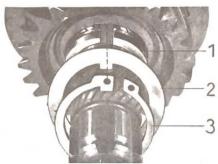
Circlip and thrust washer fitted to the end of the mainshaft. 1. Mainshaft, 2. Thrust washer, 3. Circlip.
